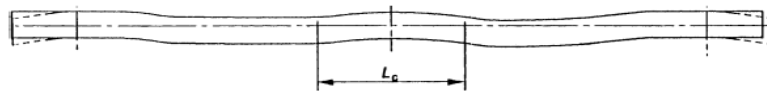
Gull-winged drop weight tear test (DWTT) specimen [23]
